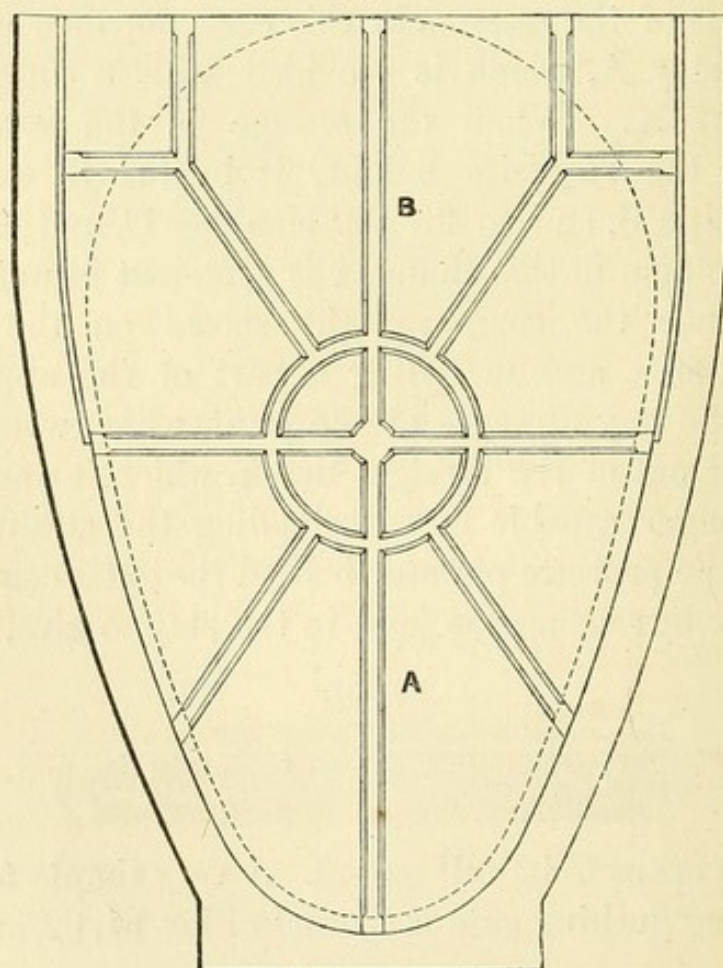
showing plan of gate, Fig. 62 its vertical section, and Fig. 63 its front elevation.
